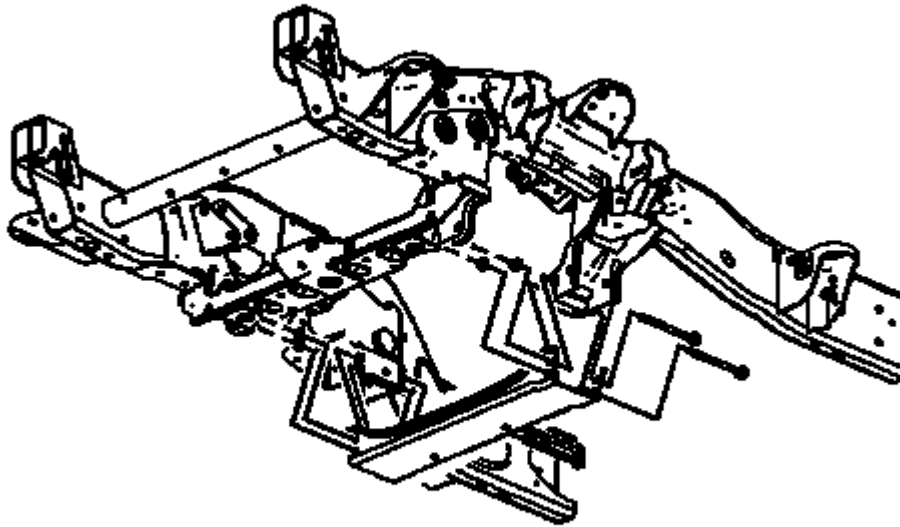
View Of Electrical Connector, Cable Channel Bolt & Pin
